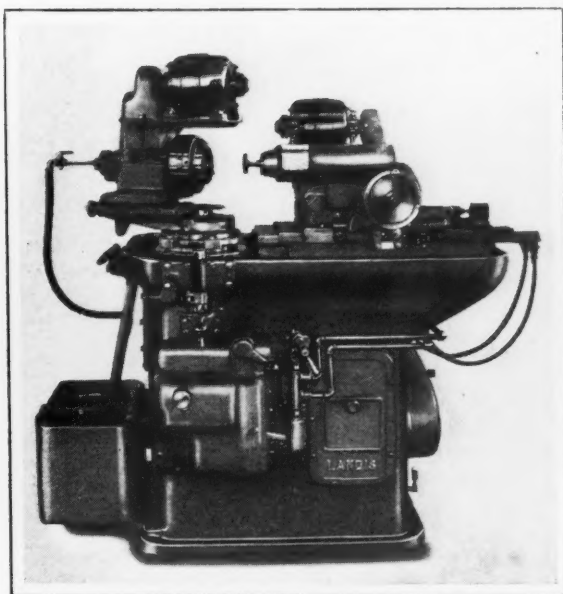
Landis Ball-race Grinder in which Three Machine Movements are Obtained Hydraulically
